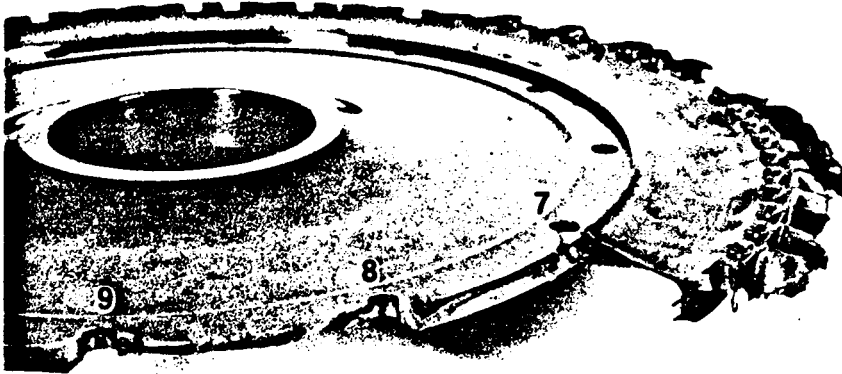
13th stage compressor disc, crack A, fatigue crack between tie bolt holes No. 7 and No. 8.
